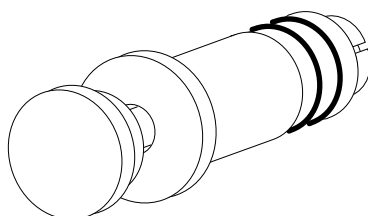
Inlet valve seal on the inlet valve seal tool
